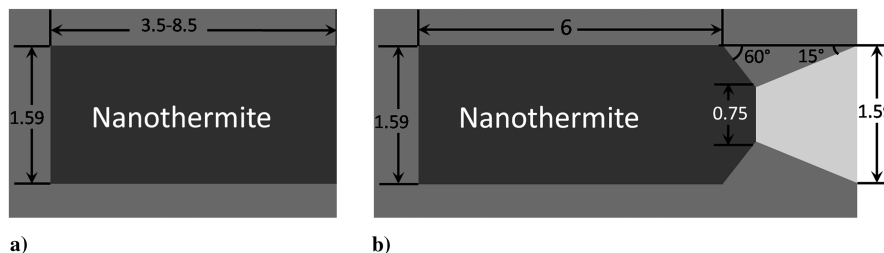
Motor design a) without nozzle and b) with convergent–divergent nozzle. All dimensions are in millimeters.
